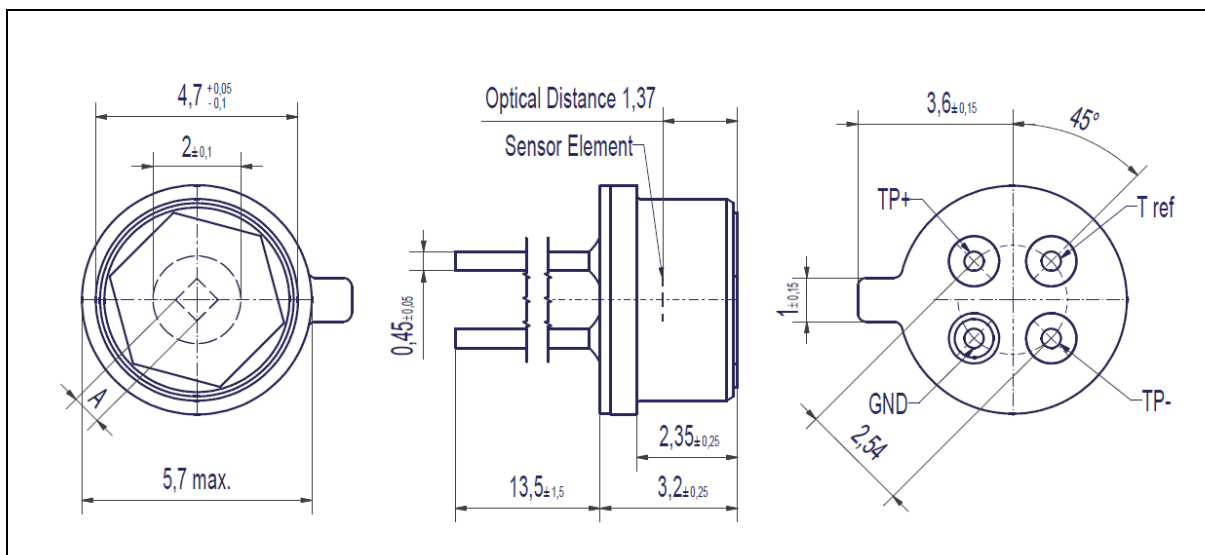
Mechanical Drawing of the TPD 1T 0622B (Drawing No.: 2/71828-0)
